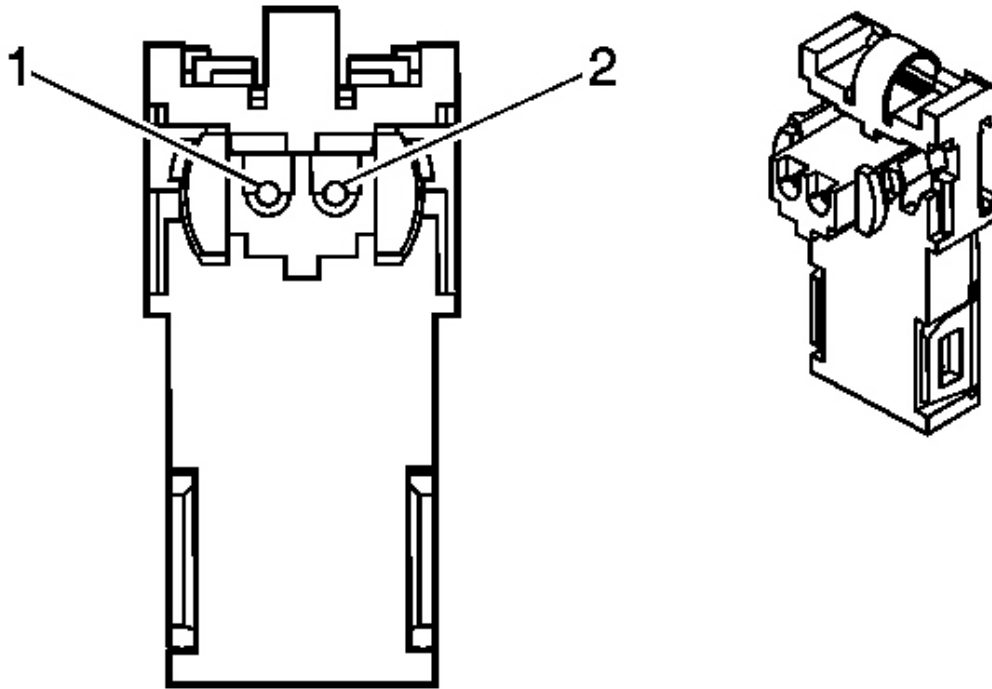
Seat Belt Pretensioner - Left Front Connector End View
